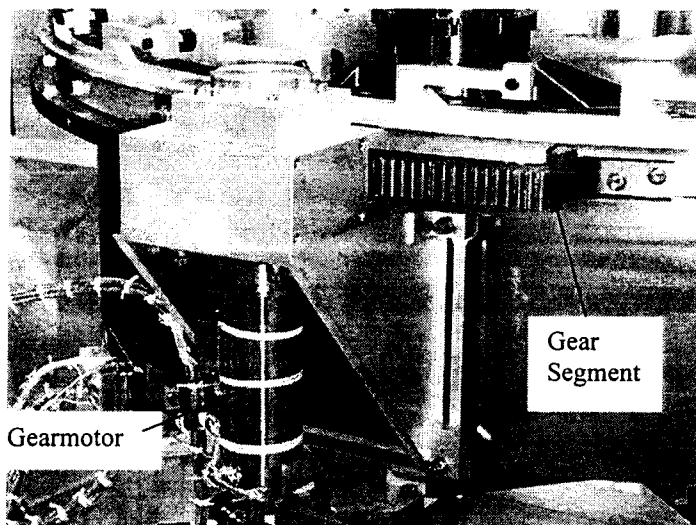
and 4b. The Lock Ring Drive Mechanism Assembly uses a pinion and sector geartrain to move the Lock Ring to its locked and unlocked positions.
